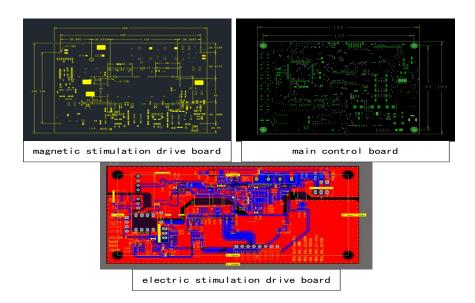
Design of magnetic stimulation drive board, main control board, electric stimulation drive board
